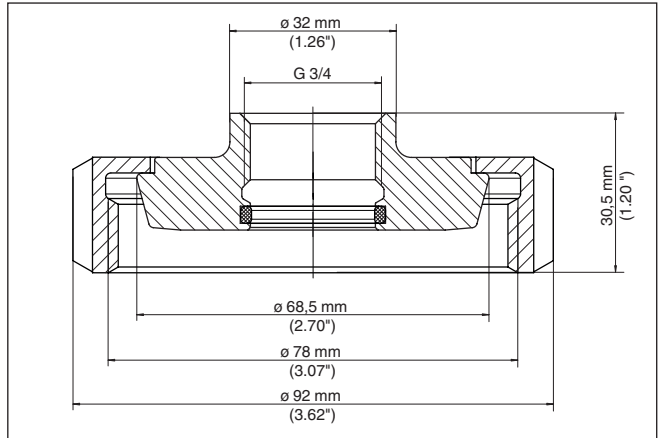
Dimensions of threaded adapter G $\frac{3}{4}$ (DIN 3852-X) on slotted nut DN 50 (DIN 11851) PN 25
